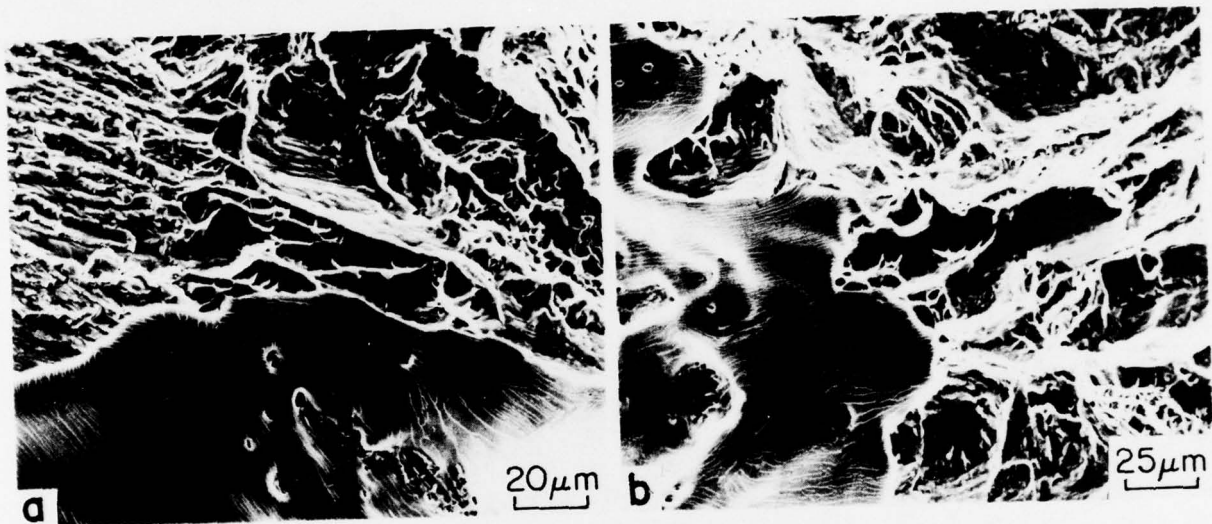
Scanning electron micrograph of the fracture path in Condition 4  $K_{Ic}$  specimen: (a) fatigue precrack to rapid fracture transition; (b) rapid fracture.
